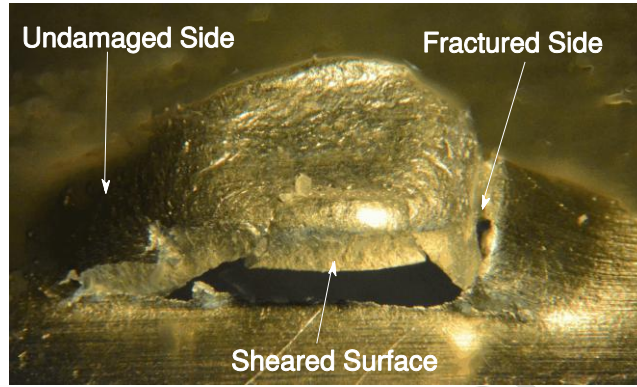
Macrograph of a clinched joint produced with rectangular tools and joining force $F_j = 21.6$ kN.
